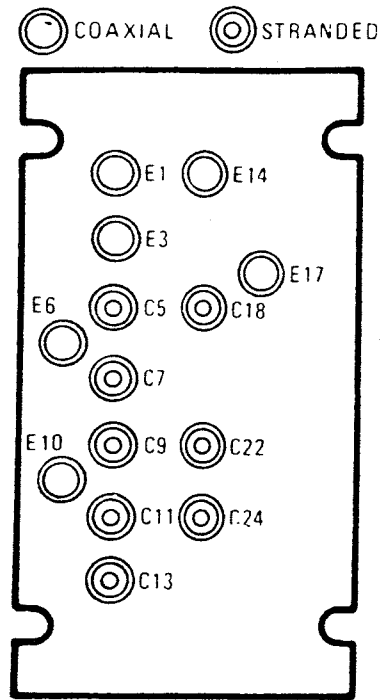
Filter Plate Assembly A2A13FL1 Component Locations
